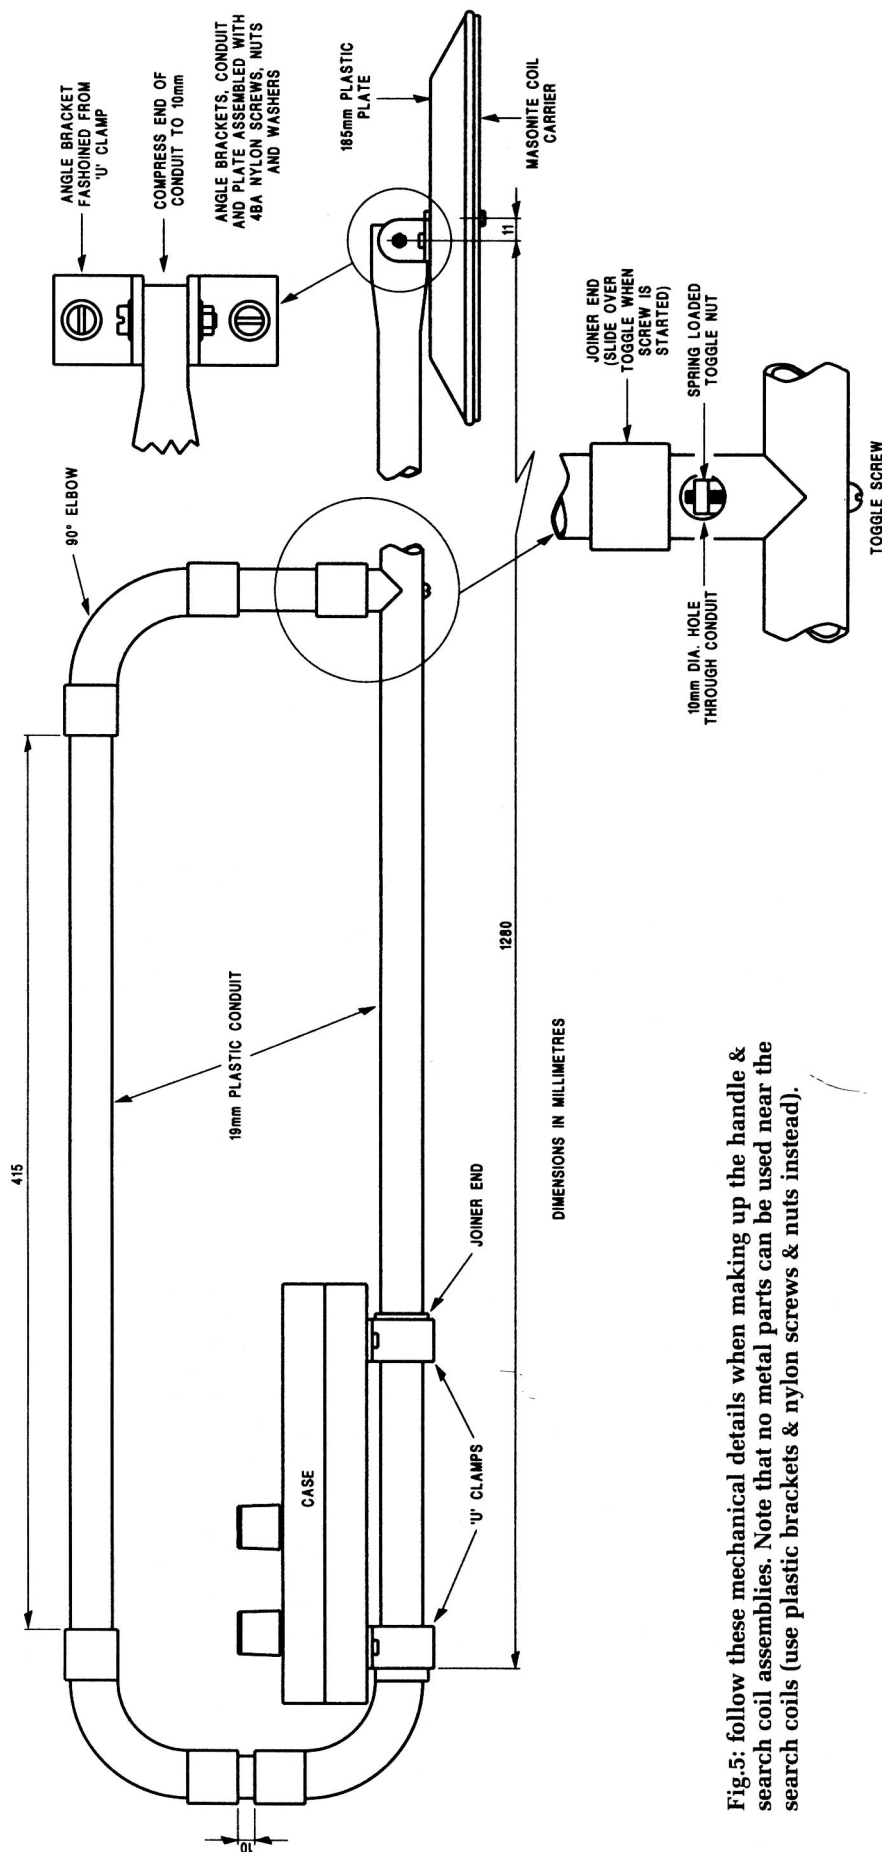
follow these mechanical details when making up the handle & search coil assemblies. Note that no metal parts can be used near the search coils (use plastic brackets & nylon screws & nuts instead).
